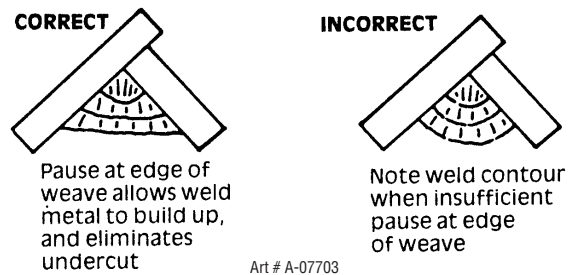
Examples of Vertical Fillet Welds
